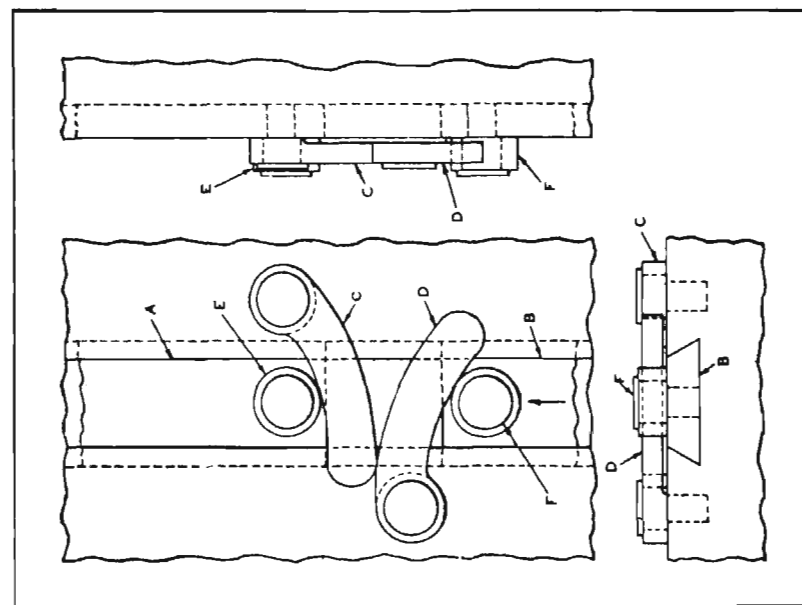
Mechanism for Producing a Variable Reciprocating Motion.
